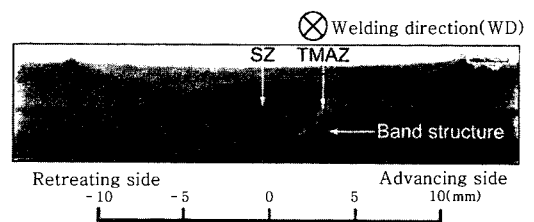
Cross section perpendicular to the welding direction in 304 stainless steel friction stir weld
